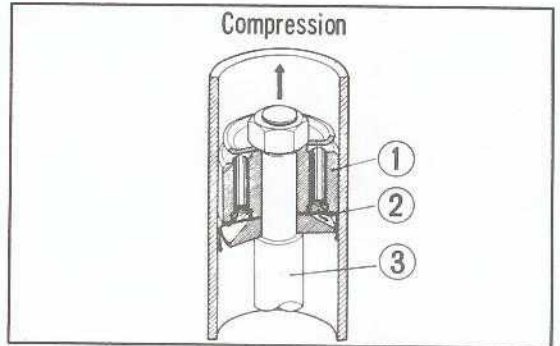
① Piston ② Valve ③ Rod
